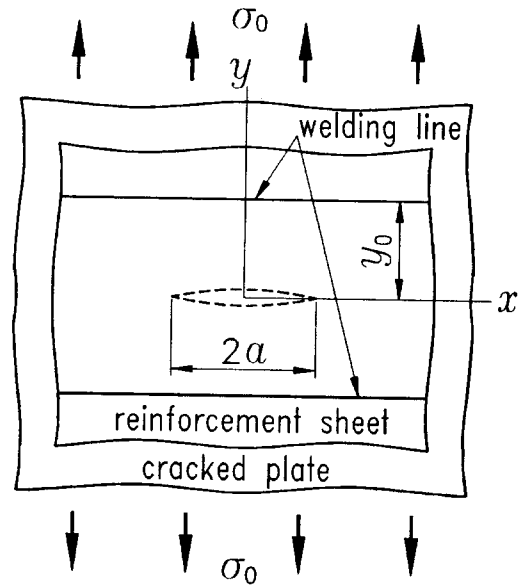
The cracked plate reinforced with a sheet by seam welding.
